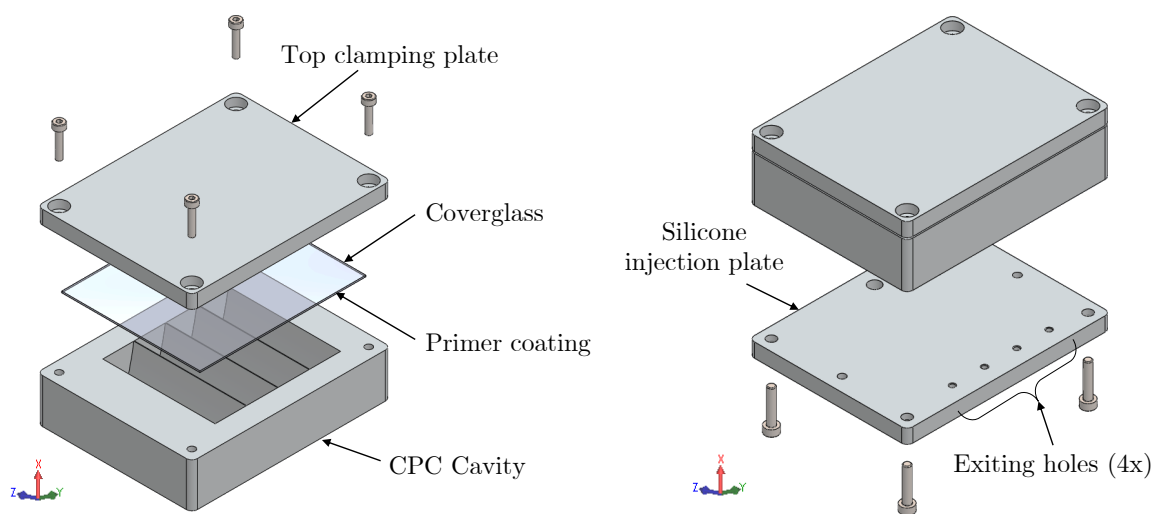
Diagram illustrating injection mold assembly. Coverglass is assembled between the top clamping plate and the CPC cavity (left). Silicone injection plate assembly (right).
